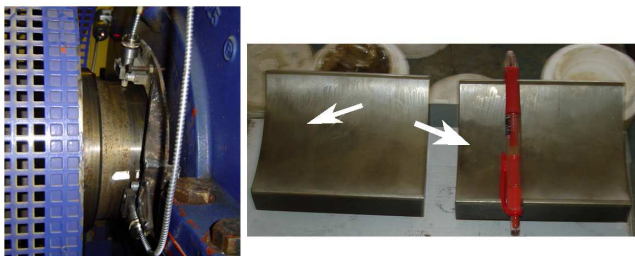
The BR at 7th bearing vibration displacements peak-to-peak values s_{p-p7Z}, s_{p-p7Y} and gaps-radial clearances $\Delta 7Y, \Delta 7Z$ measurement set with two sensors 7Z and 7Y and damaged pads
